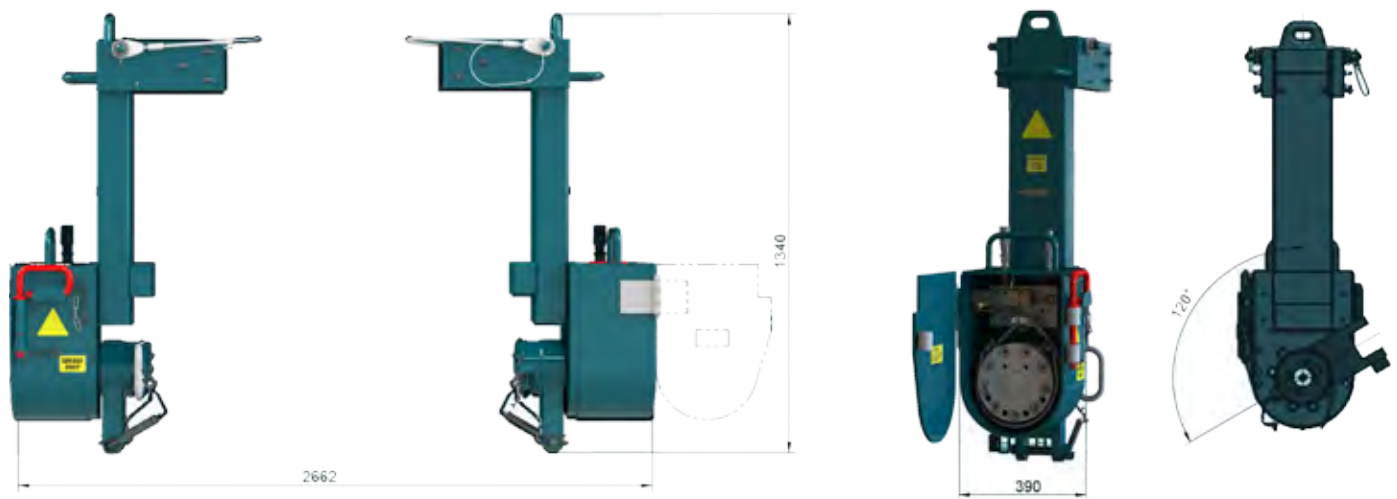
FORUM Handling Tools Double Elevator Rotator System Main Dimensions
